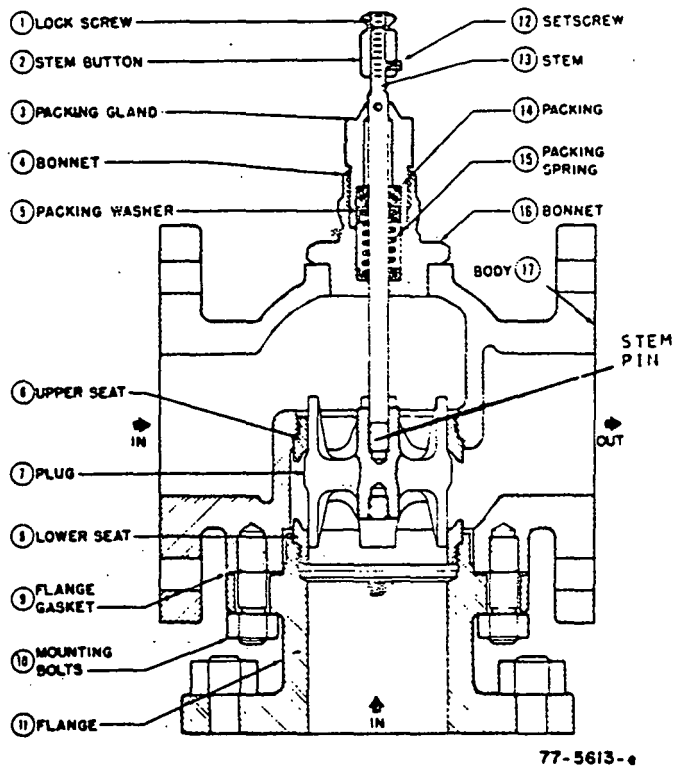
Cutaway of Typical V5013A Flanged Type Body.
